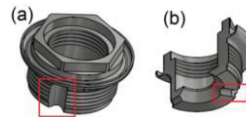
Housing of the Bell-Shaped Button, with highlighted gassing channels: a) Side channel. b) Bottom channel.
